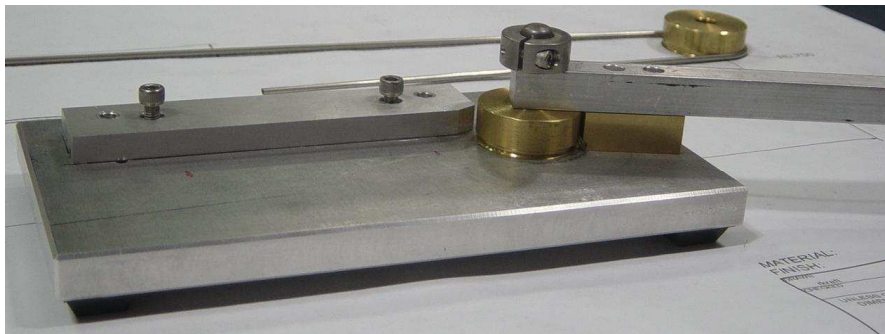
Tool used to bend the pipe using two guide discs, one to check the length and the final diameter and the other to correct the opening angle to the final measurement.
